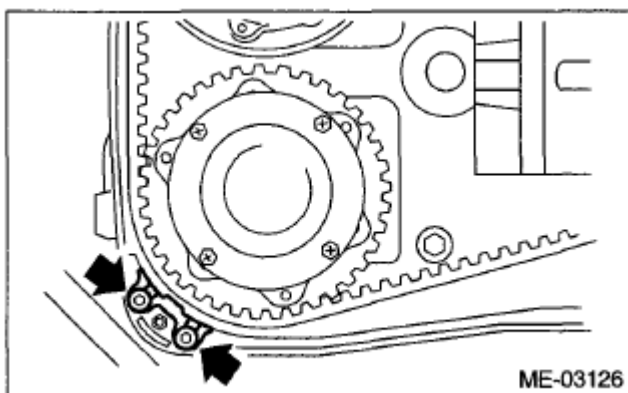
Locating Timing Belt Guide Mounting Bolts (4 Of 4)
